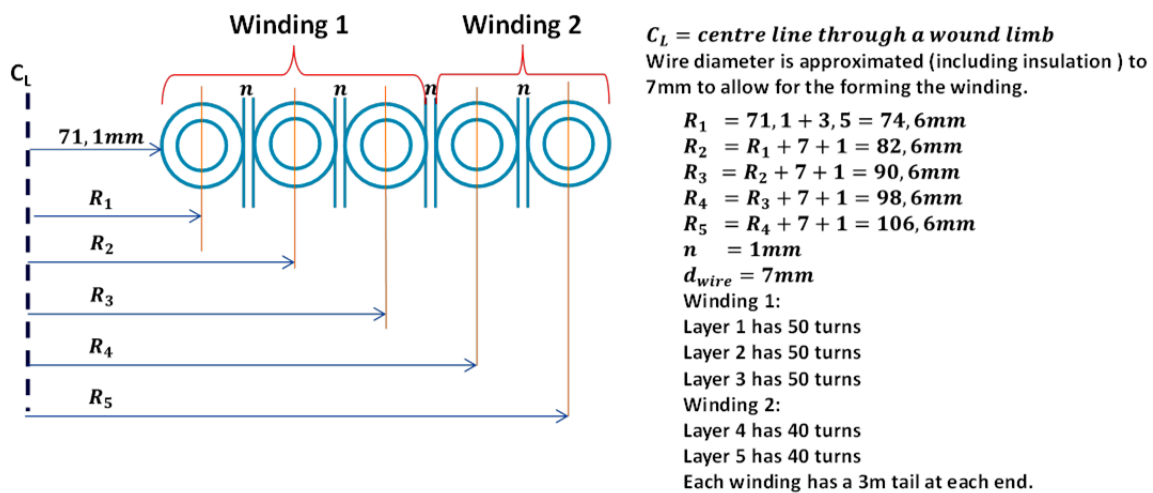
Radial cross-section of the winding assembly on a limb showing the radius of each layer.
